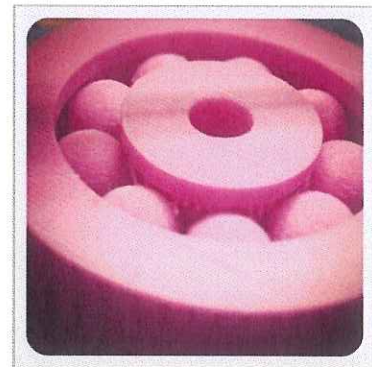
A polymer Ball-Bearing, created entirely in one print using a RepRap Huxley Machine
